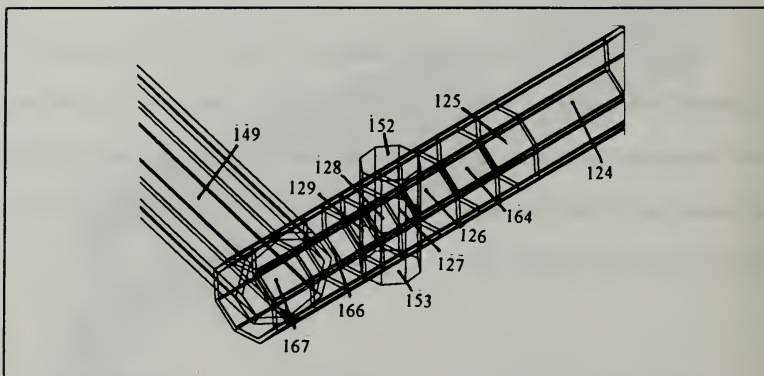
Attachment Point of Right Longitudinal Tube and Torque Tube
